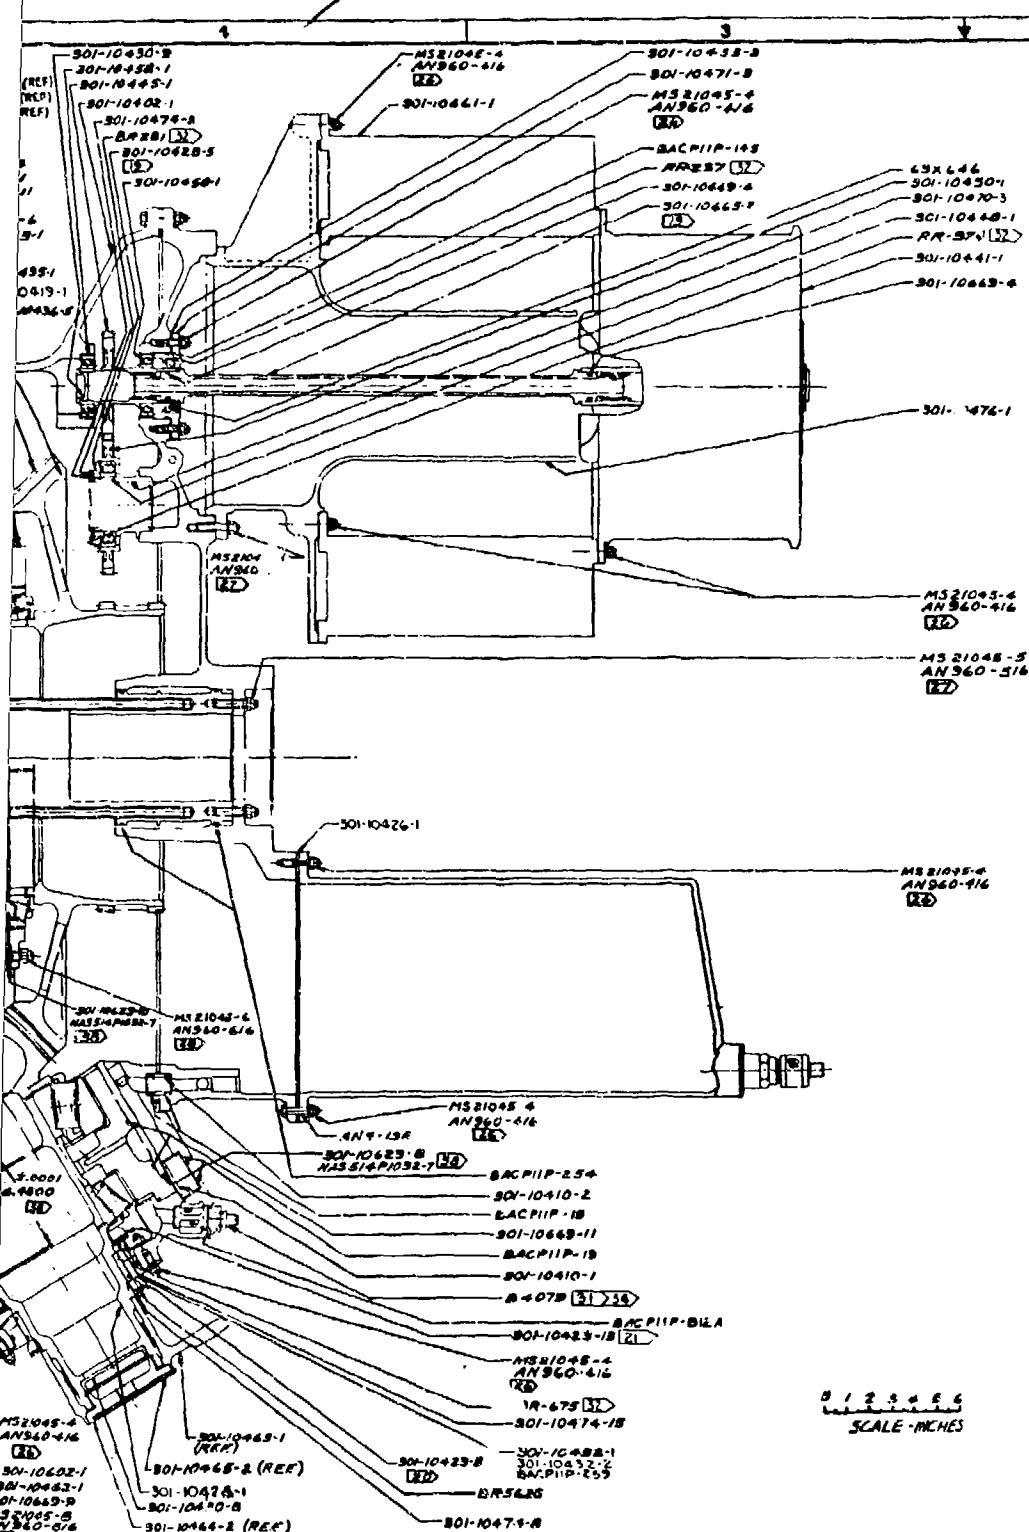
Aft Transmission Assembly (Sheet 1 of 5).
